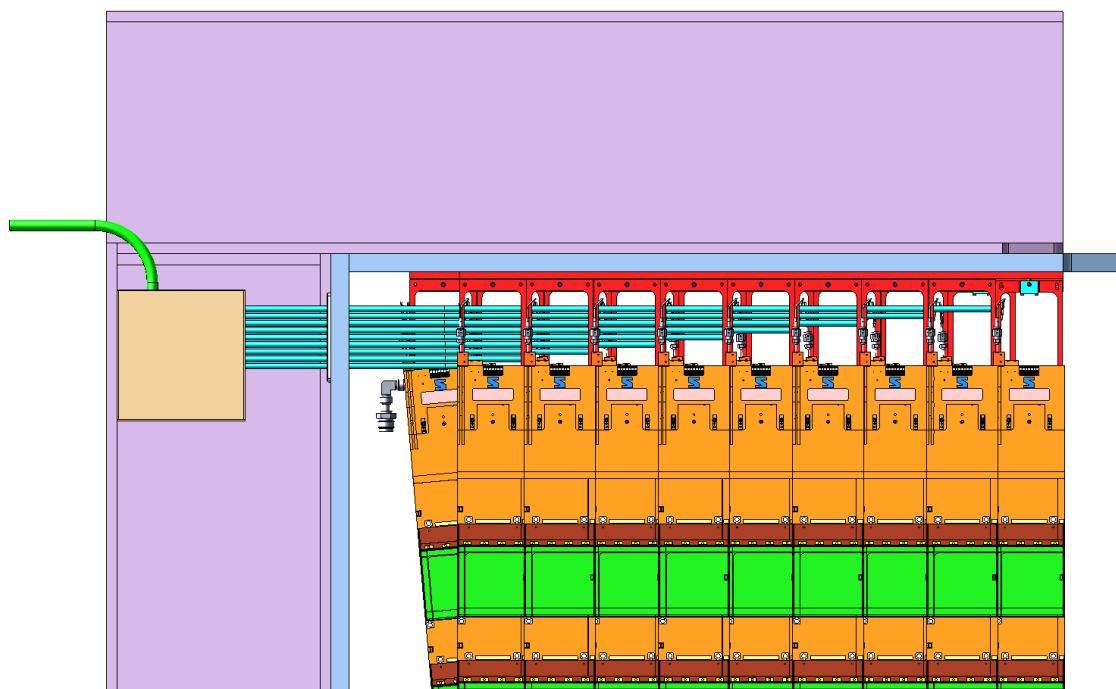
A close-up view showing the mechanical interfaces of the CO₂ tubes, stave frames, and HV cables.
